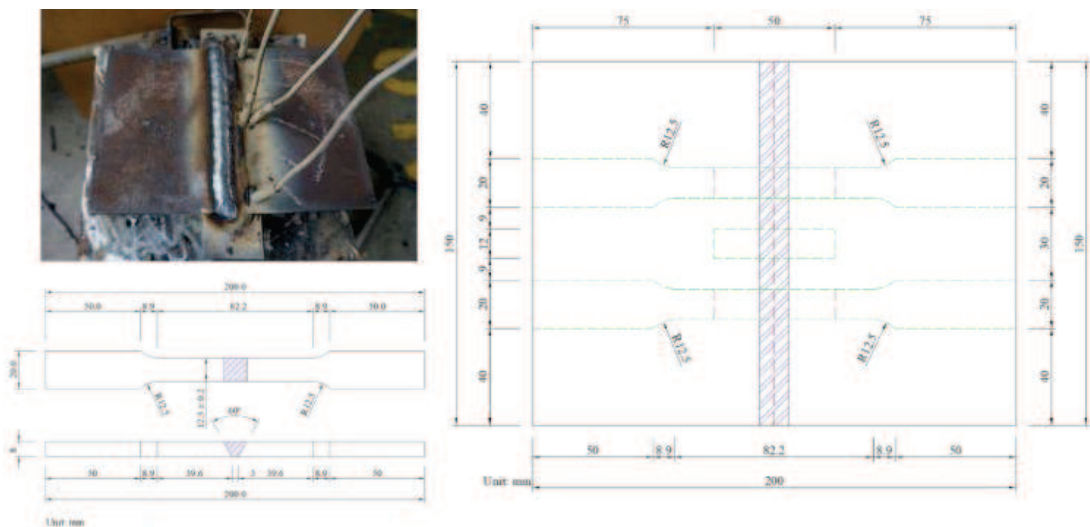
Geometric dimension of tested S690Q HSS butt joints
